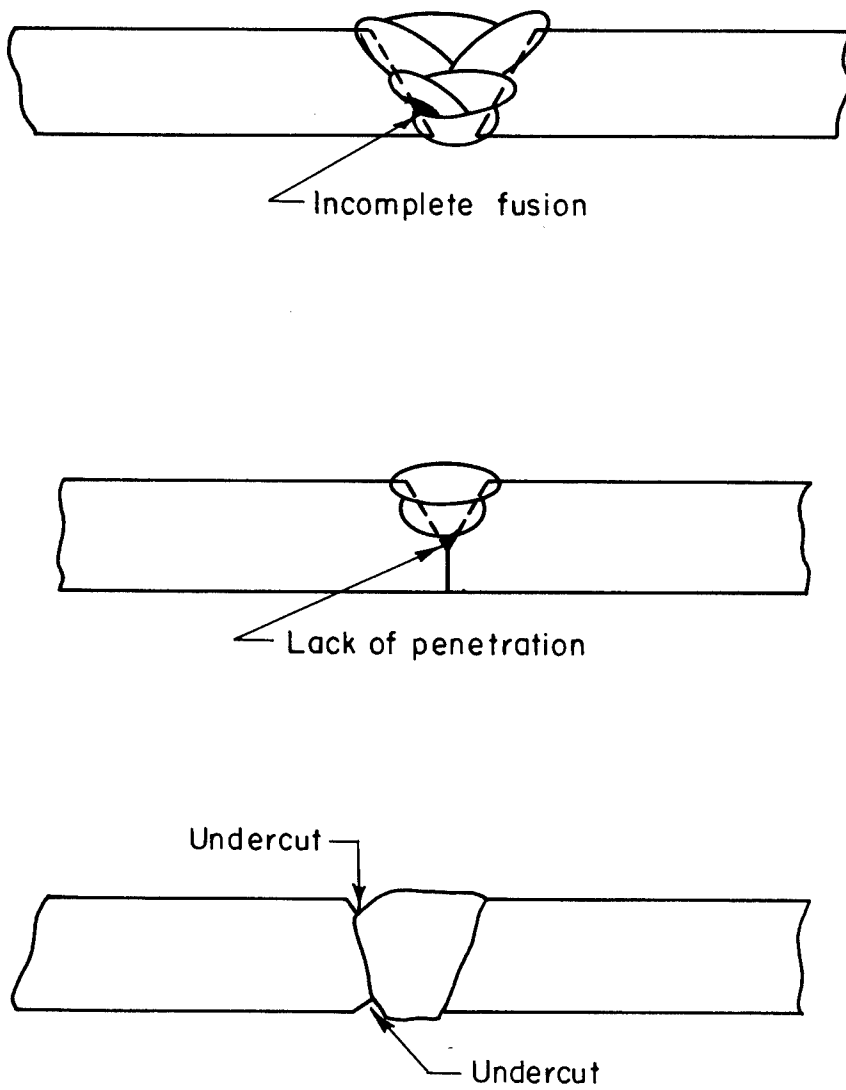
DEFECTS COMMONLY FOUND IN ARC WELDS
